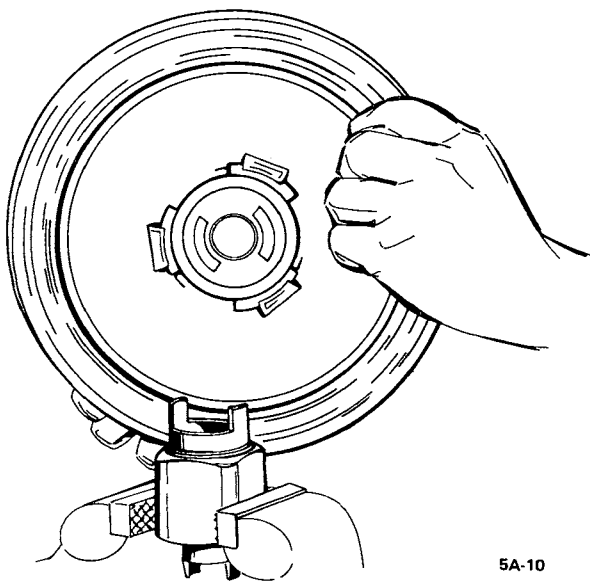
A-11 Positioning Primary Power Piston In Tool J-23101 (Small Dia. End Up) Mounted In Vise
